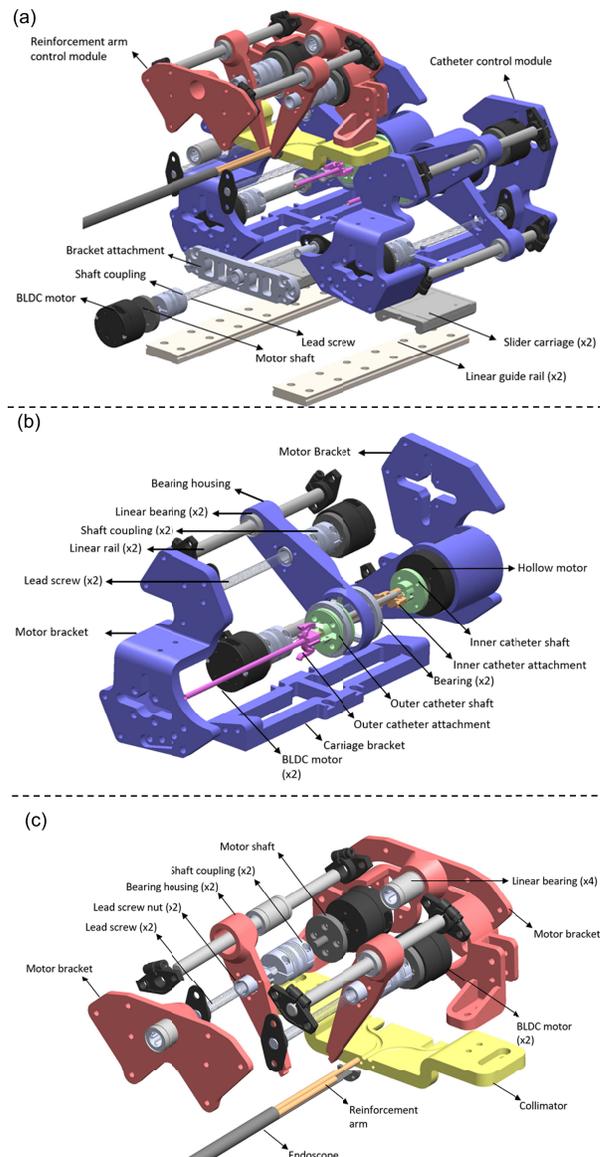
(a) overview of the CAD model neurosurgery robot, which also depicts the overall modular assembly. (b) design of ultra-steerable catheter control module. (c) design of working channel tube control module
